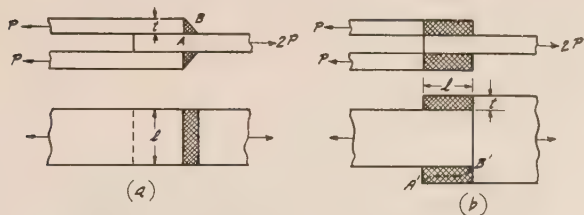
TWO TYPES OF WELDED JOINTS
